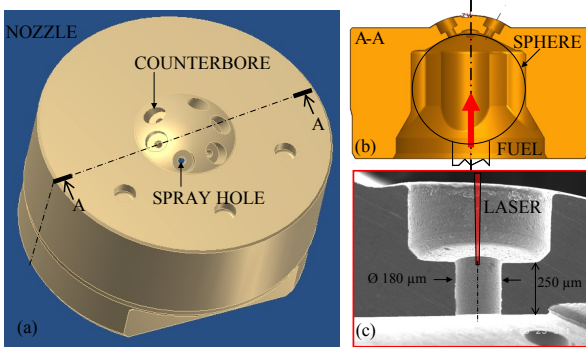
(a) 3D view of a GDI nozzle: spray hole are drilled concentrically with the counterbores; (b) nozzle section: cone-sphere contact and fuel direction; (c) laser drilling direction and cylindrical hole geometry achieved at the end of the drilling process.
